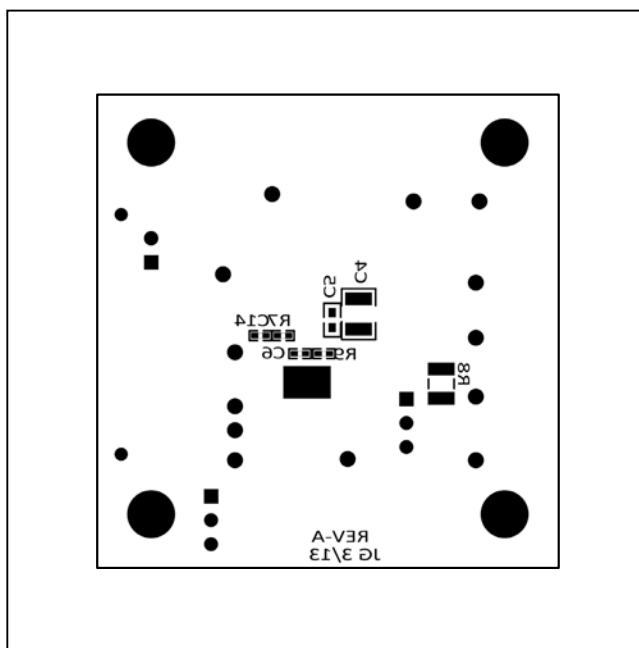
MAX16936 EV Kit Component Placement Guide—Solder Side
